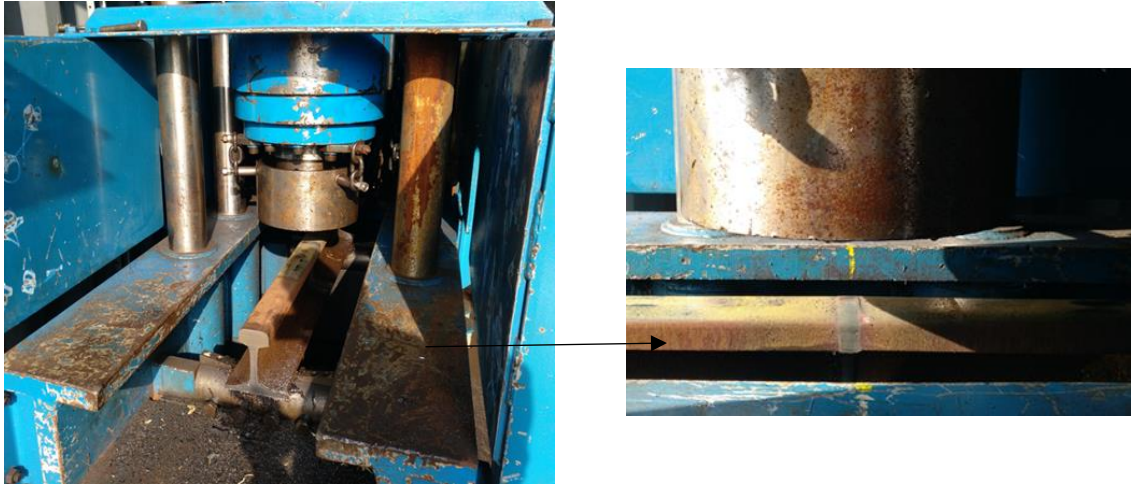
Three-point bend tester, with weld FZ below the bending load.
